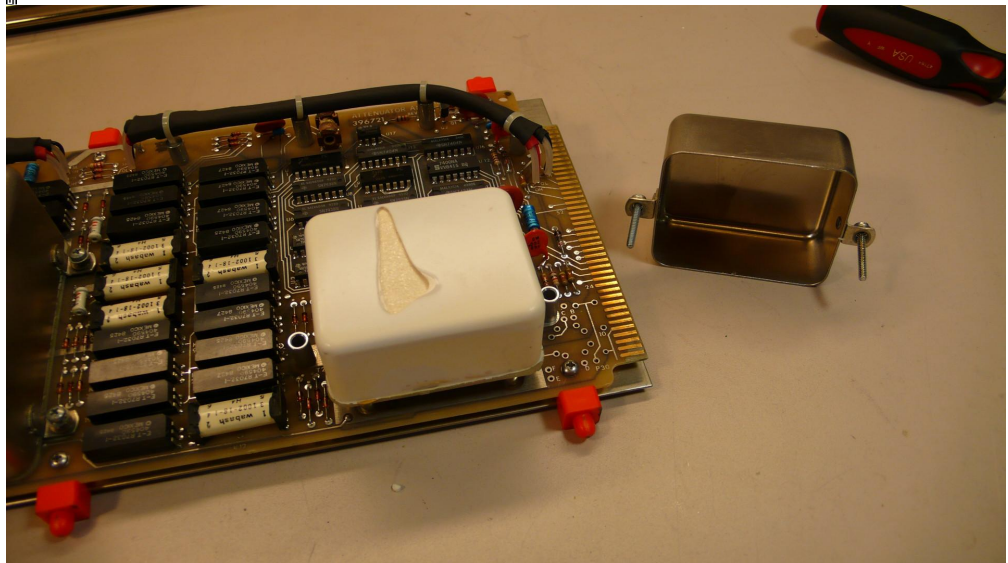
A6 Attenuator PCB Assembly (cont)
